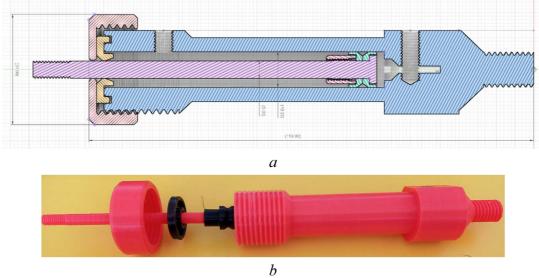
First iteration of a 3D printed linear actuator (a), finished parts of the first iteration of a 3D printed linear actuator (b)
